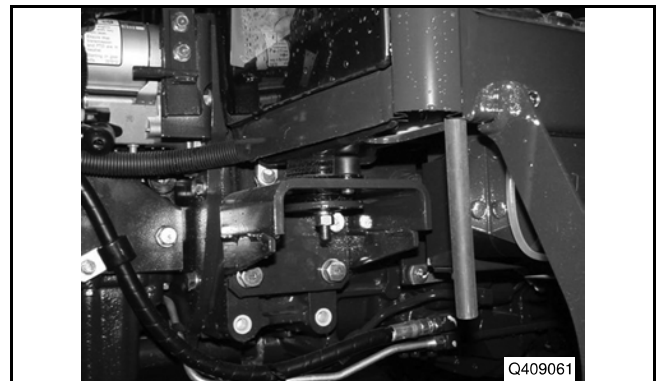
Remove the bolts through the rear cab or platform mounts.
